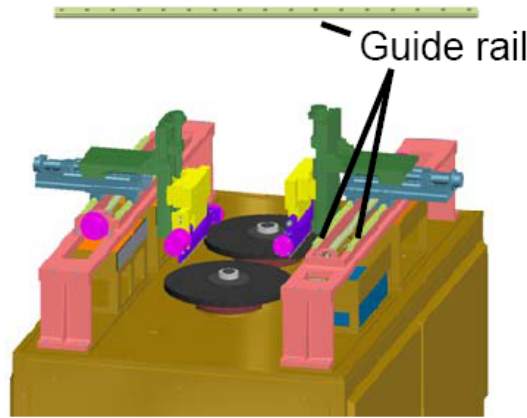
Virtual prototype of the gem processing machine tool and its guide rail
